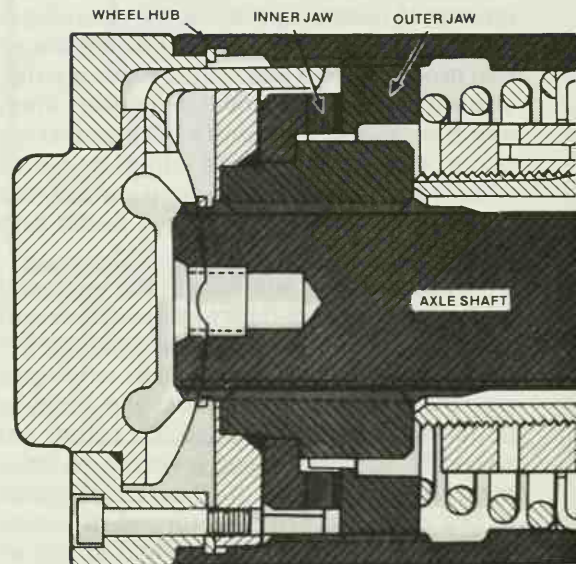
A freewheeling clutch hub in the locked position. (Ford Motor Company)
